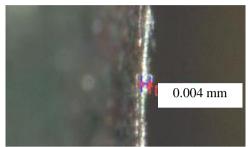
Smallest Burry dimension at material 0.8 mm
